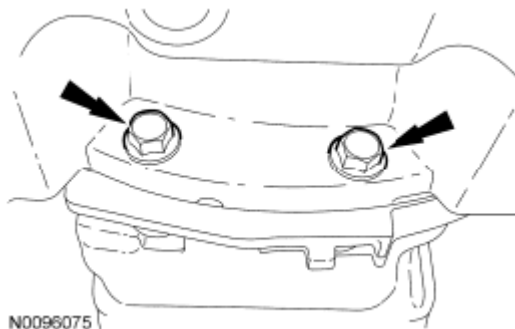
Locating Bellhousing-To-Oil Pan Bolts
